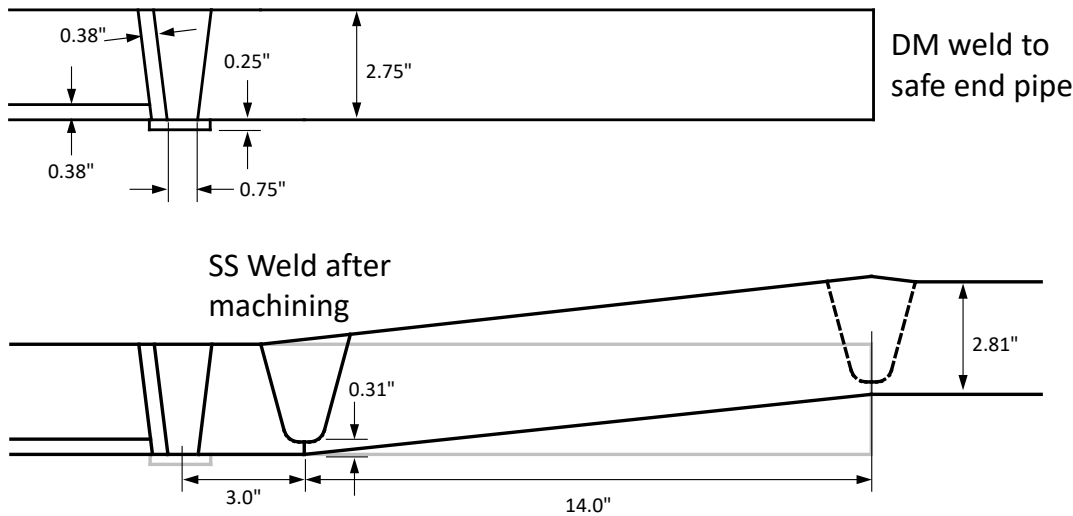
Reactor Coolant Pump Inlet Suction Nozzle Weld Geometry
